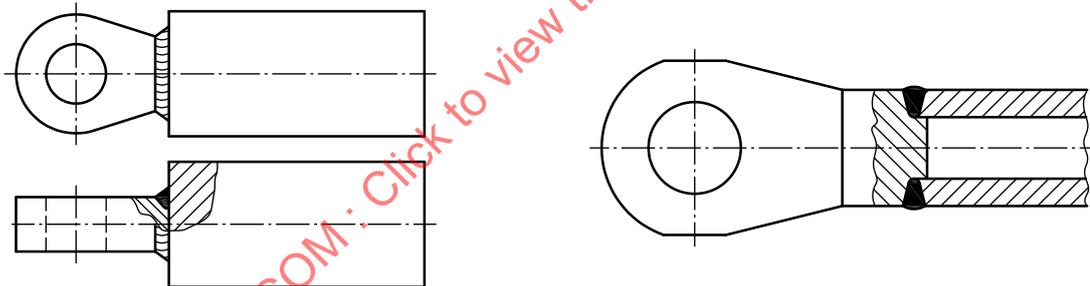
Piston rod welds, fillet weld (left) and groove weld (right)
